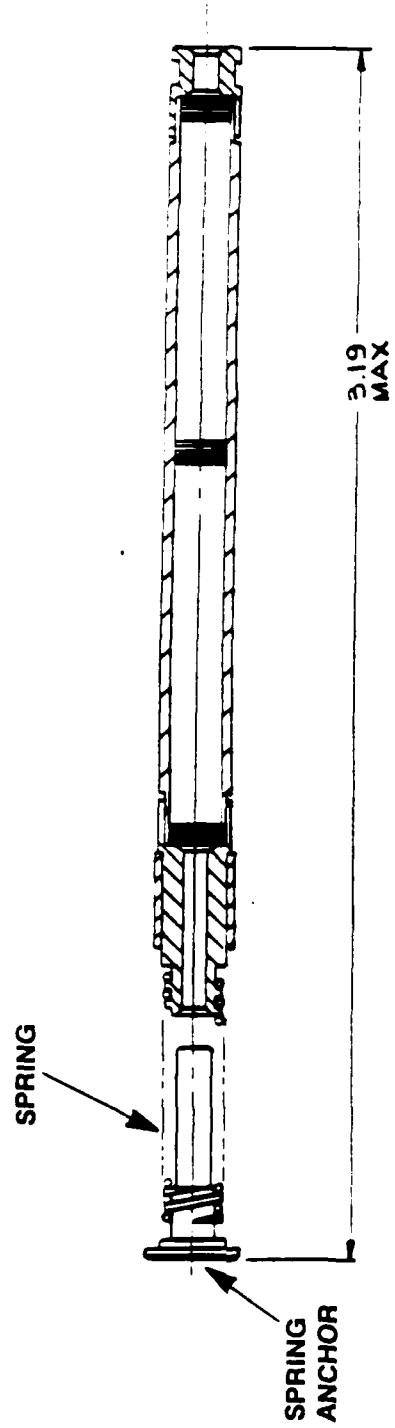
Displacer and Restoring Spring Subassembly
